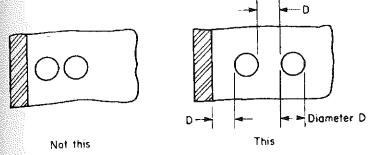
Minimum spacing for holes and sidewalls.
